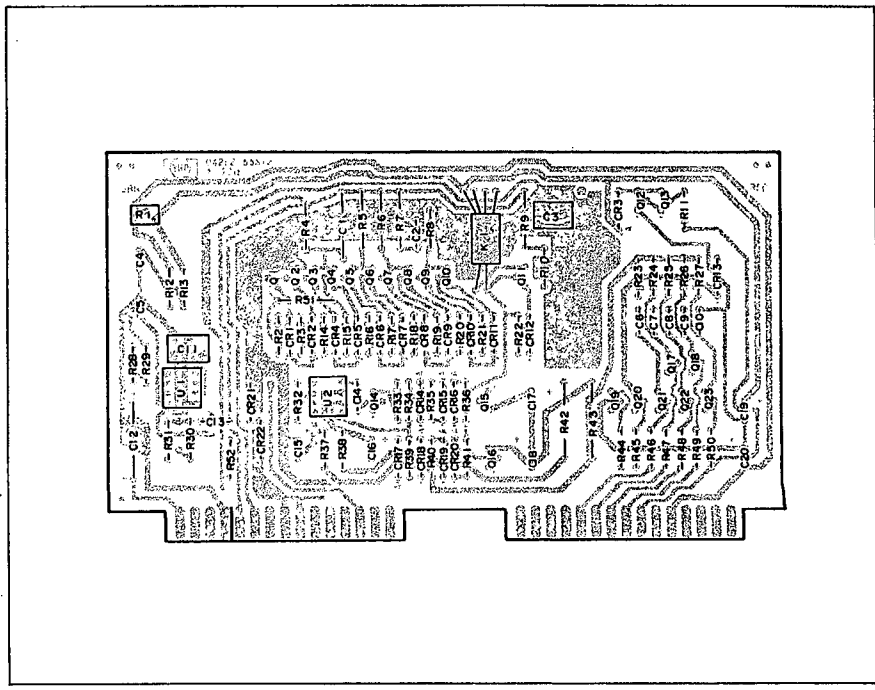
A12 Range Resistor Board Assembly Component Locations.
